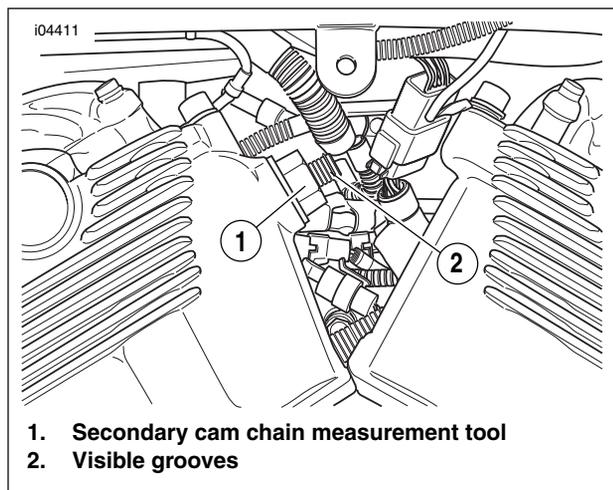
Secondary Cam Chain Measurement Tool Installed in Front Cylinder
